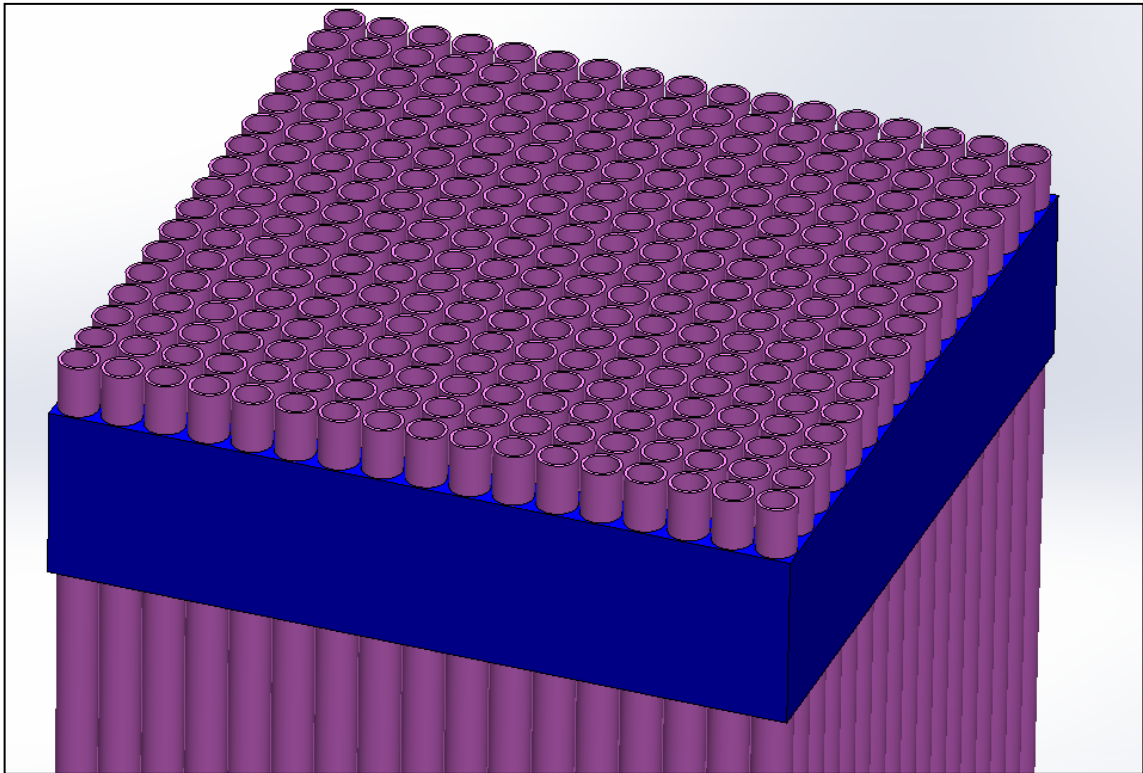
Close up of the stainless steel tubes that will contain the individual fuel rods
